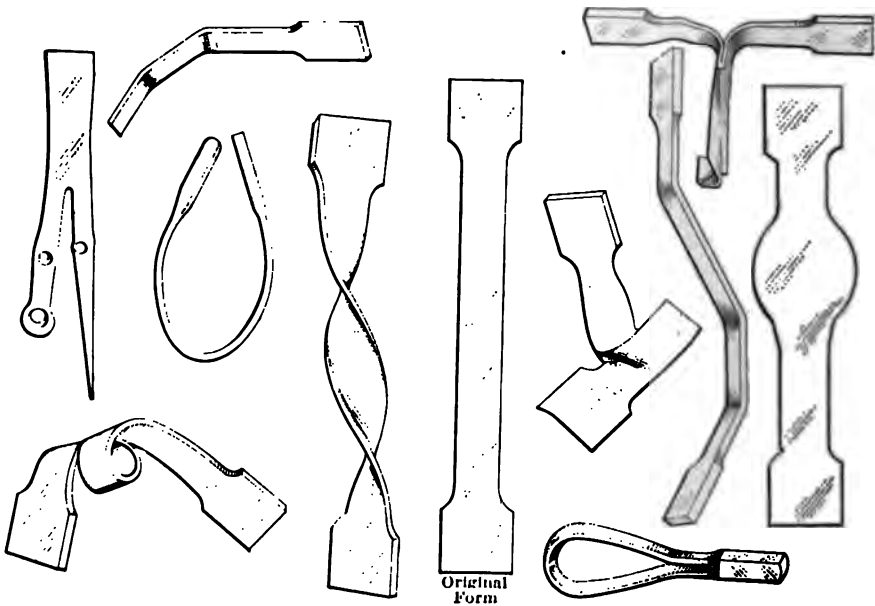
Examples of Cold-bending, Forging and Welding of Malleable Cast-iron Specimens, all being Originally like the Undeformed Bar in the Center. (*Berlin Testing Laboratory Communications*, Vol. 4, Pl. 3.)
